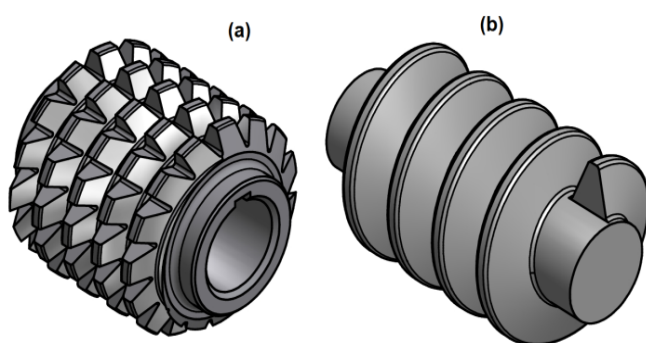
(a) Constructional solution of solid gear hob (b) Basic surface of gear hob with straight profile
